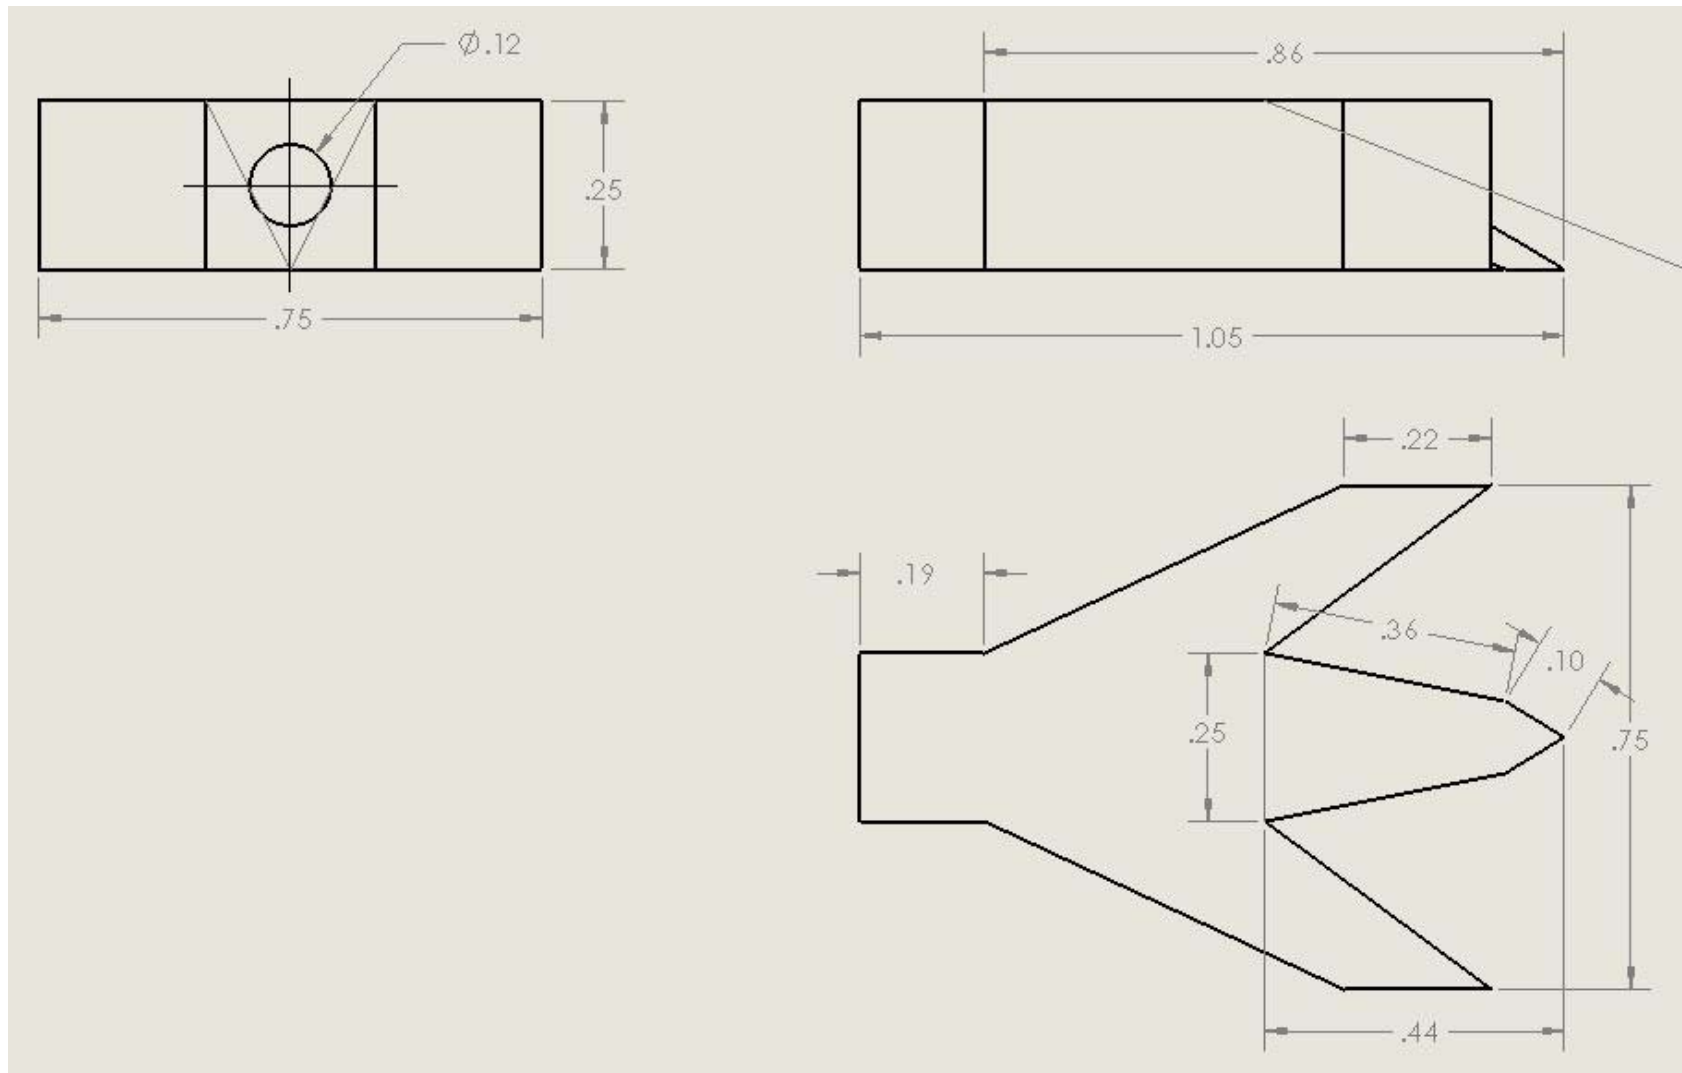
Detailed Drawing of the Hook Capture Mechanism.
